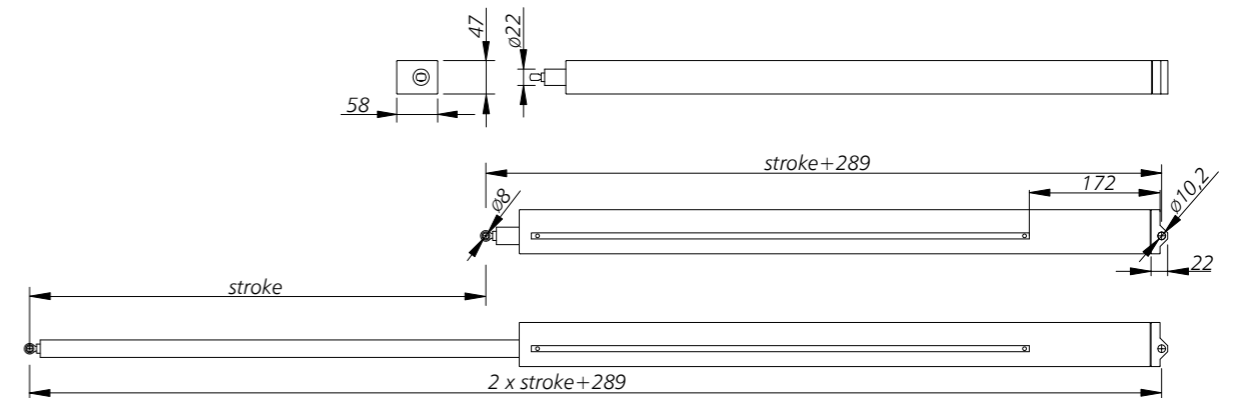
Dimensions of type G electric spindle actuator [mm]
